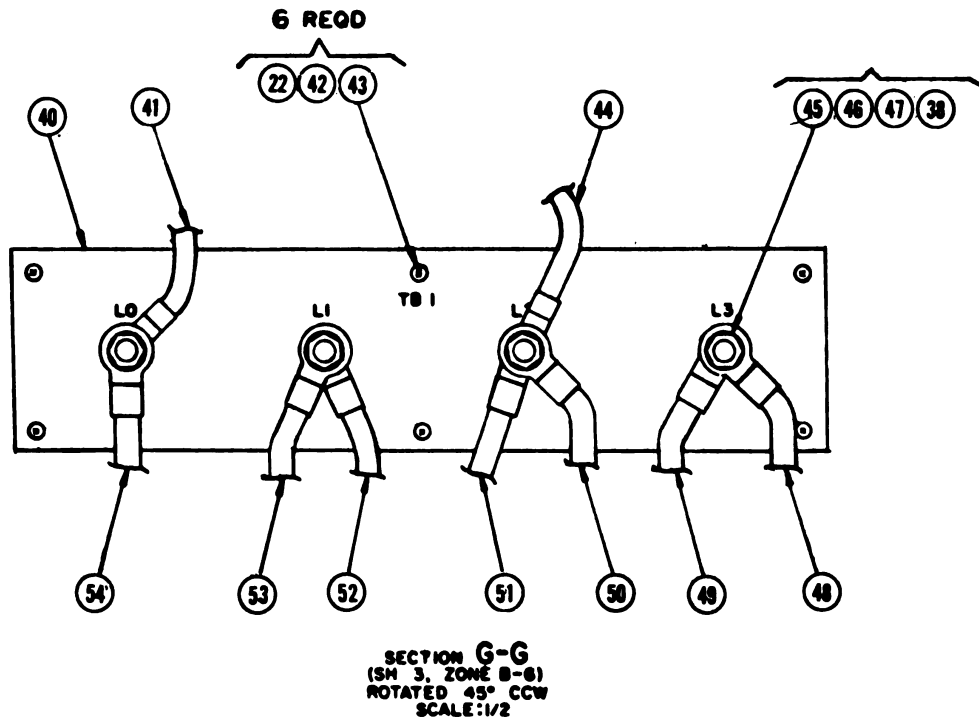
Switchbox Assembly (Sheet 5 of 7)
